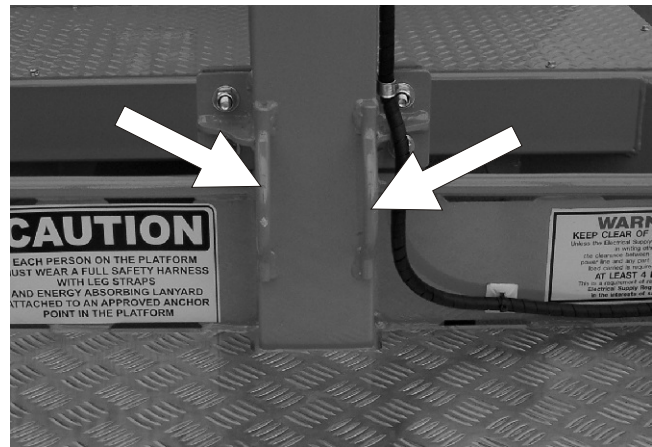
Lanyard Anchor Points - Steel Platform
